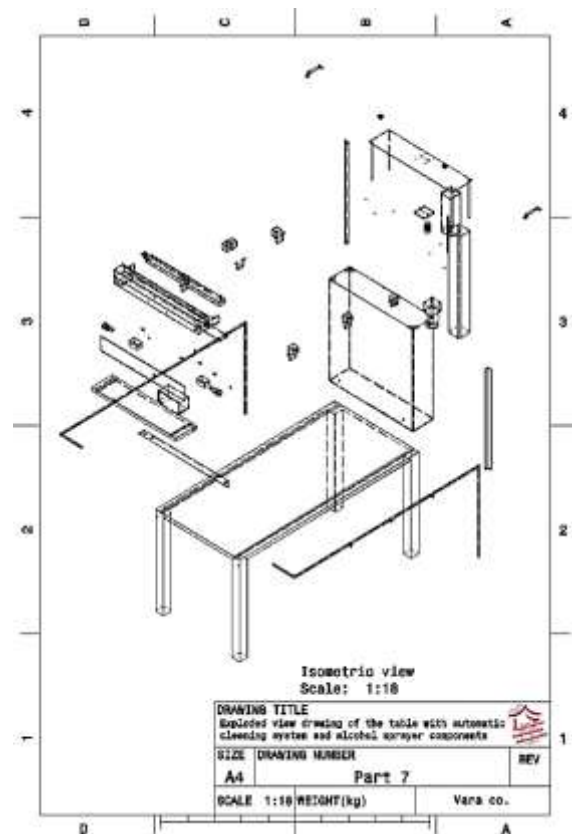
Exploded view drawing of the table with automatic cleaning system and alcohol sprayer components
